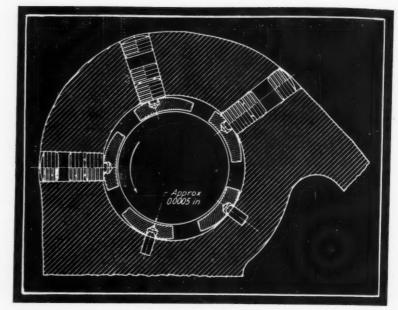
Principal of bearing design utilizing segments. These segments adjust to load and oil pressures built up hold spindle central Segments are individually adjusted to provide .0005-inch clearance
